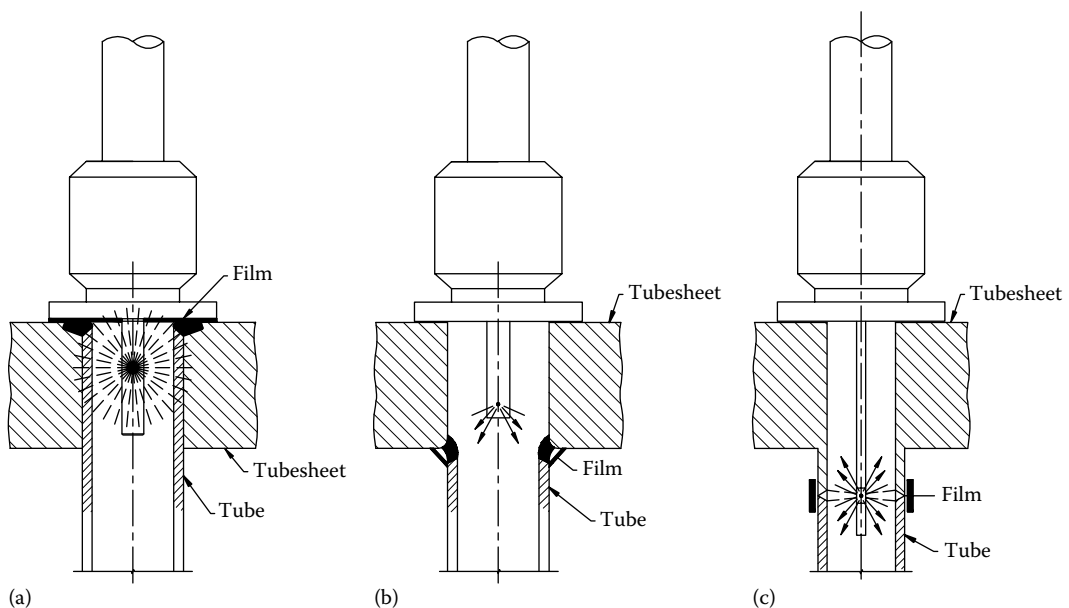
Radiographic inspection of tube-to-tubesheet weld joint by Microfocus rod anode x-rays set. (a) Front end, (b) rear side fillet weld, and (c) spigot weld.
